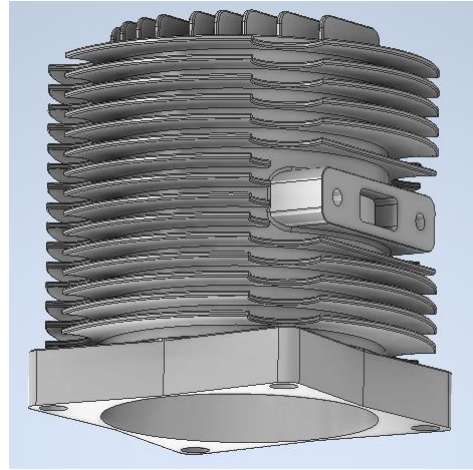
One of the engine heads made of WE43A magnesium alloy
